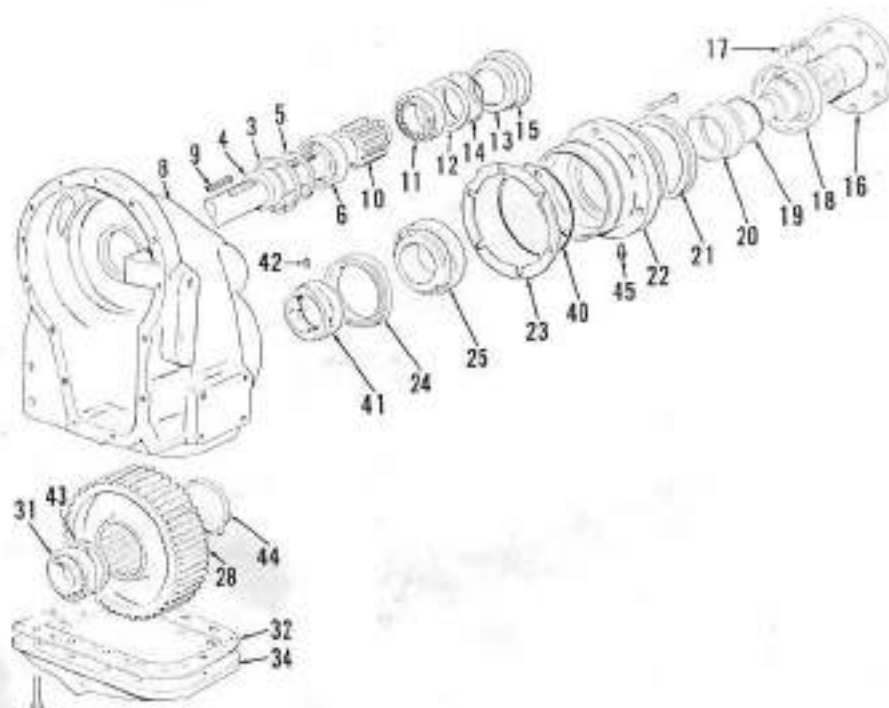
Exploded view of final drive used on models with disc brakes. Brake assembly is located in housing as shown in Fig. 145.
